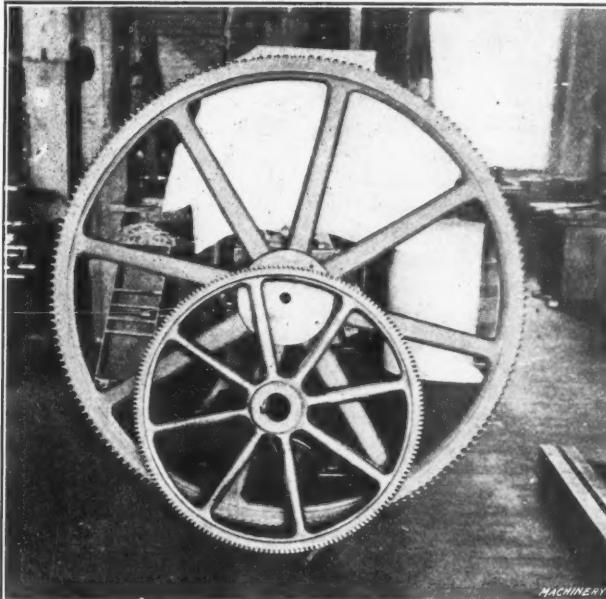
Master Dividing Wheel and One of the Dividing Wheels reproduced from it on the Whitworth Machine shown in Fig. 5
